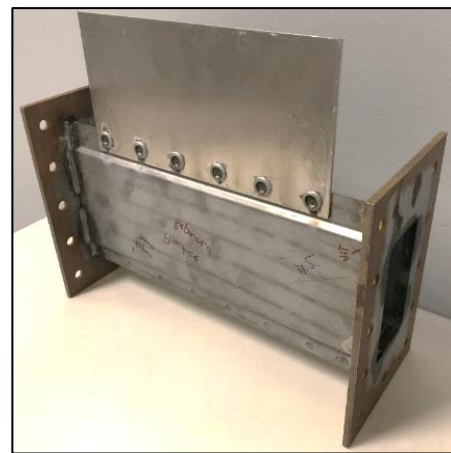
Assembled demonstrator prior to mechanical testing. Source: Honda
